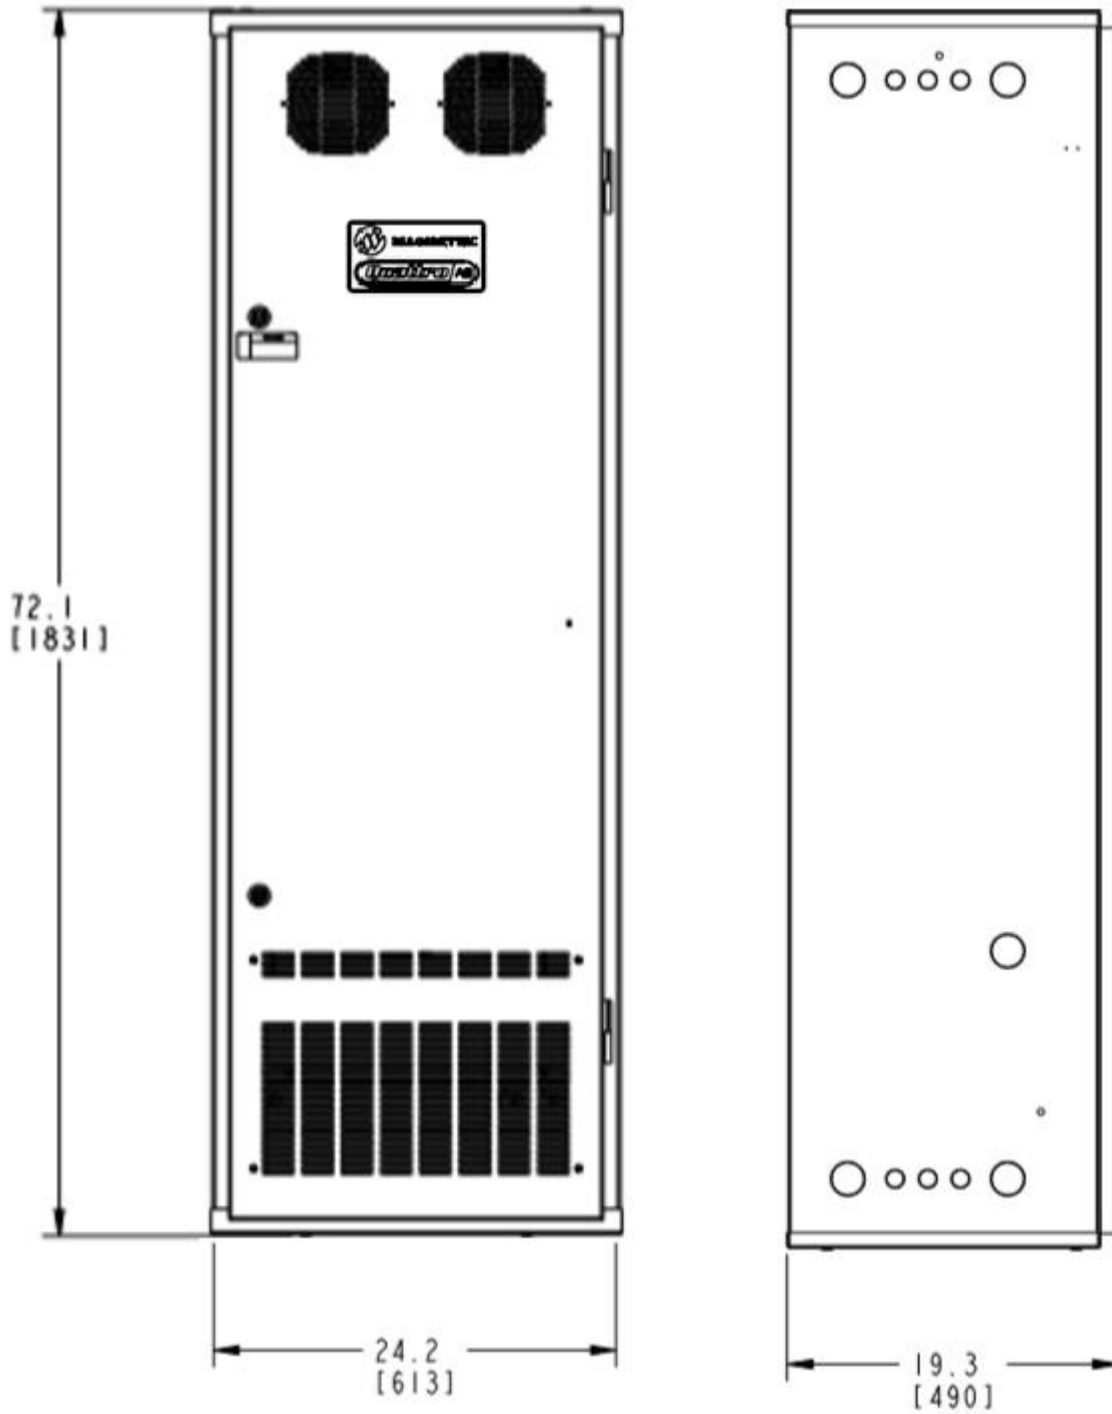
Dimensions without optional Customer I/O Panel (Enclosed)
